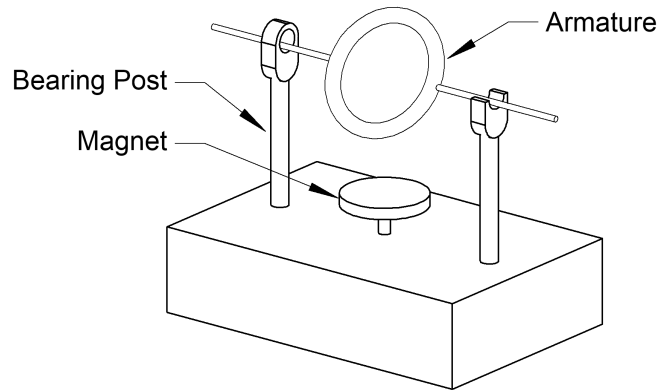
Arrangement of complete motor showing bearing posts and magnet mount. The rotor is somewhat stylized in this figure; your design may vary. Power is supplied through clip leads clipped to the bearing posts
